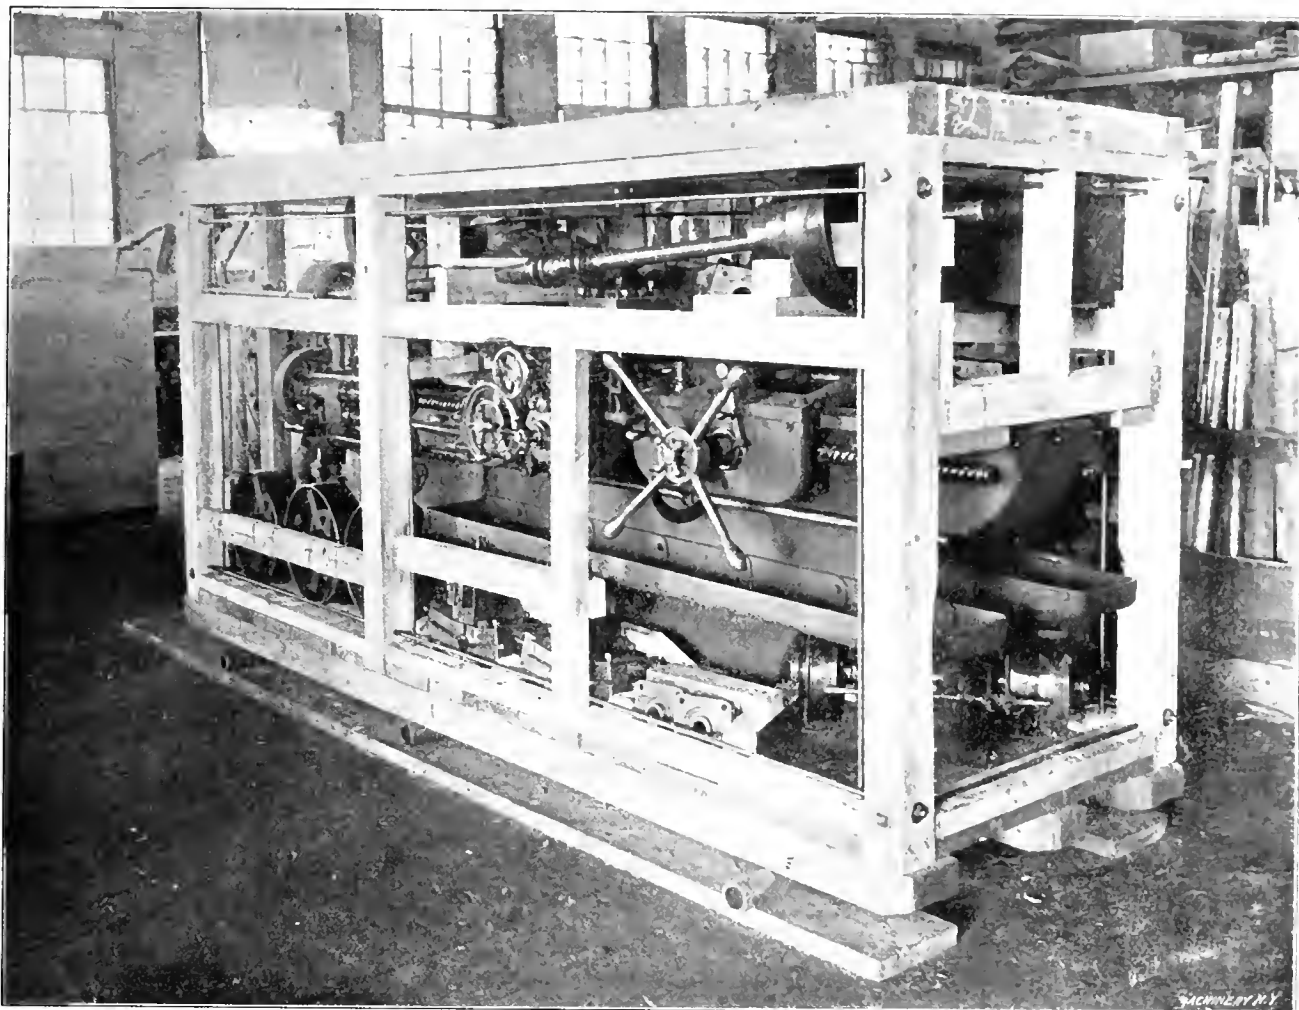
Framing of Export Case for Gisholt Turret Lathe. Note Size of Framing, and Through-bolts tying it together.
